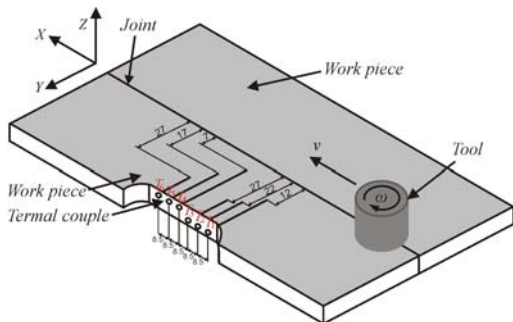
Scheme measuring points of temperature in welding work piece
